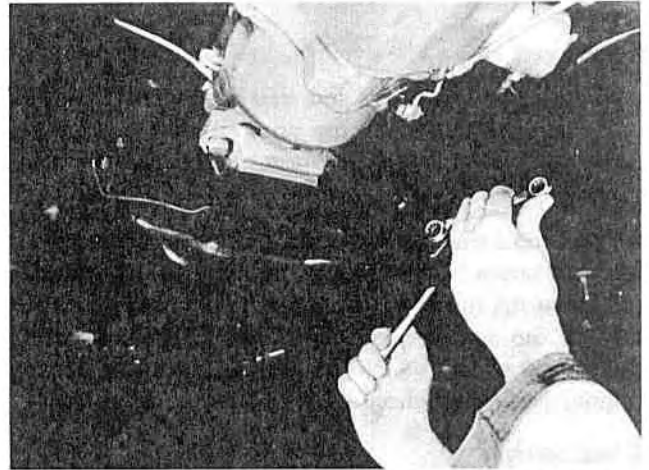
Tightening the Engine Rear Support Mounting Cross Member
